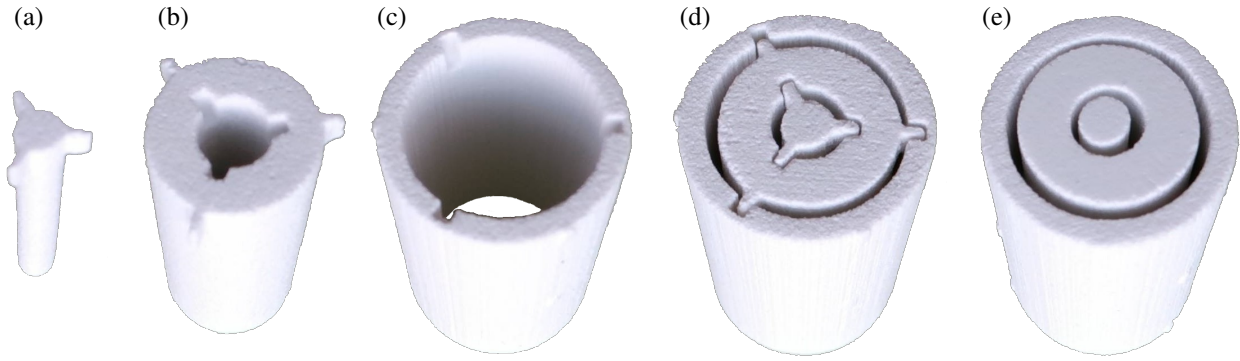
Axisymmetric absorber specimen 3D printed from gypsum powder in BJP technology: (a) cylindrical core, (b) inner ring, (c) outer ring, (d) bottom and (e) top view of the assembled sample.
